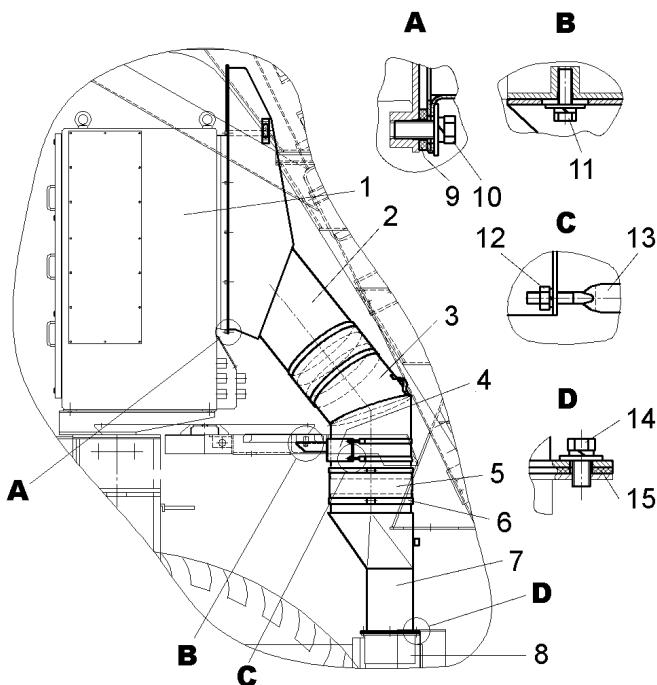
Installation of intake air lines for traction electric motors cooling traction machines:
